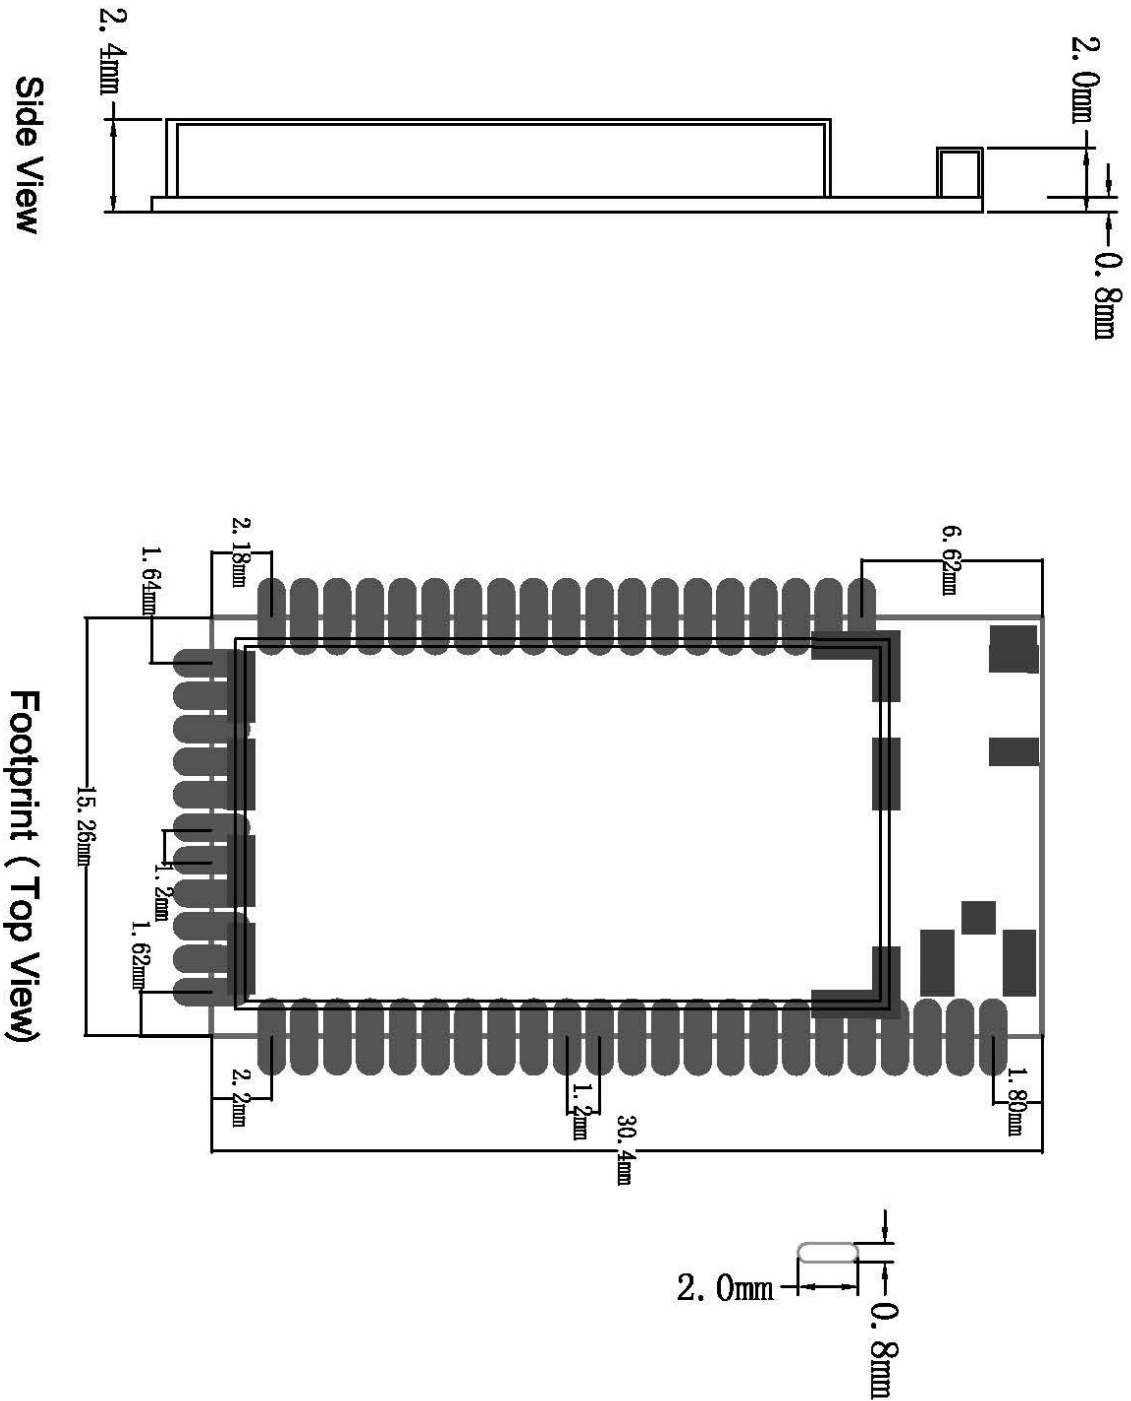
Recommended PCB Mounting Pattern (Unit: mm, Deviation:0.02mm)TOP View
